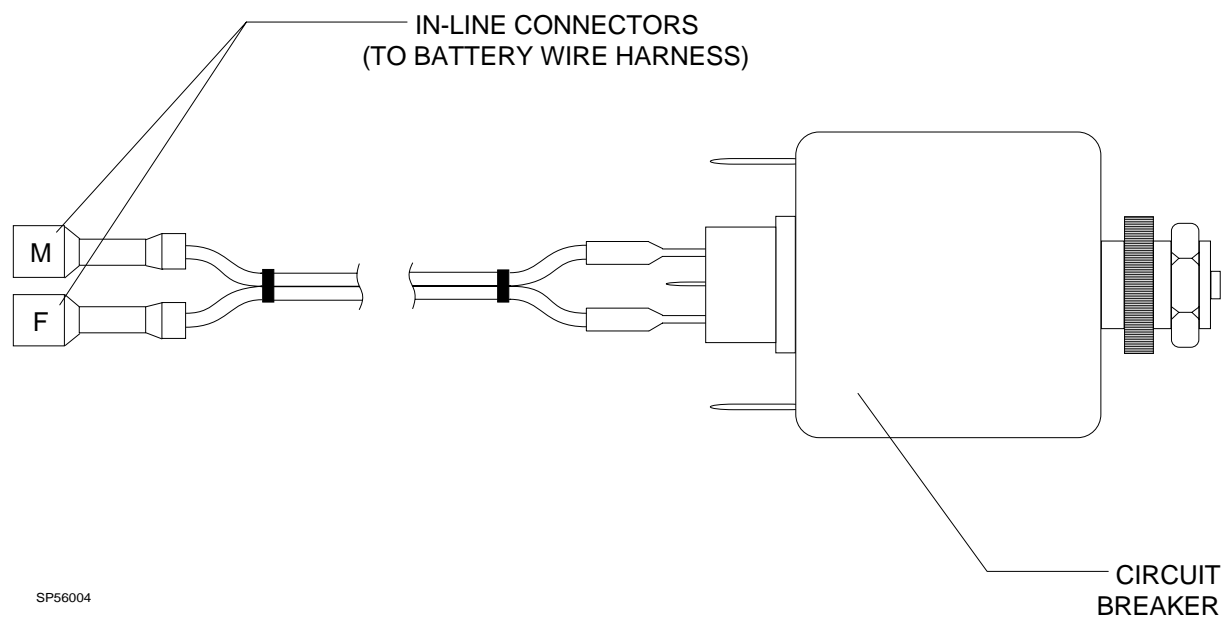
CB1 CIRCUIT BREAKER ASSEMBLY
